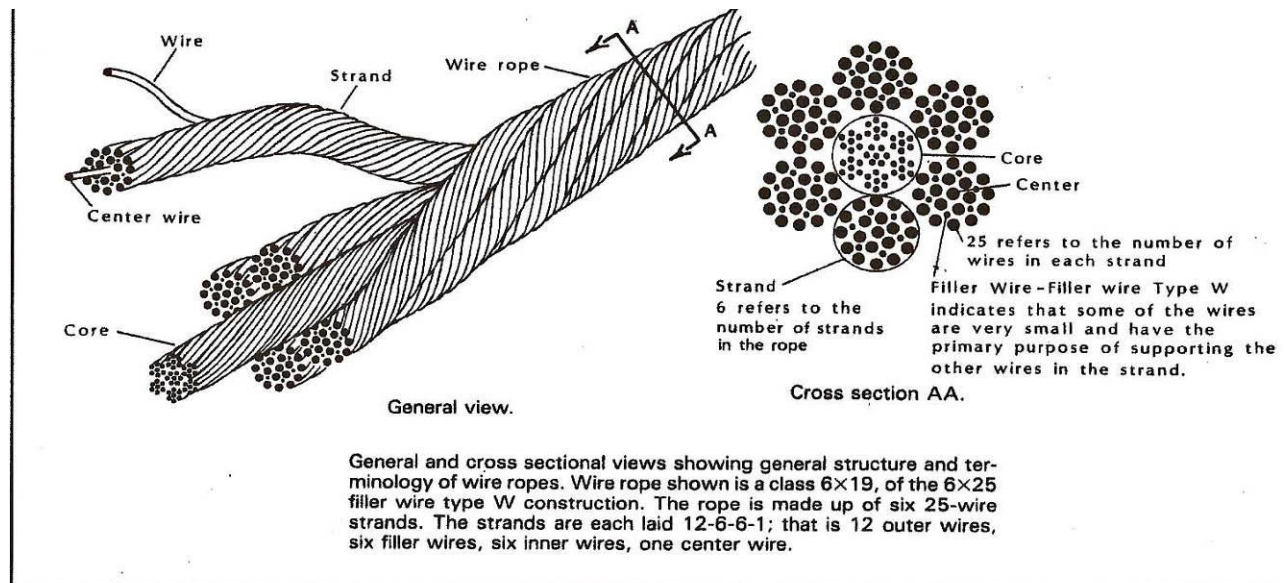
General terminology, structure, and cross-sectional views of wire rope.
